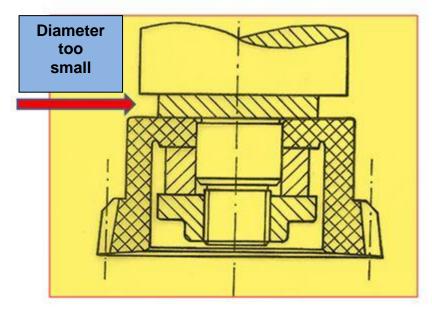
Incorrect mounting, because the upper spacer has a diameter too small
